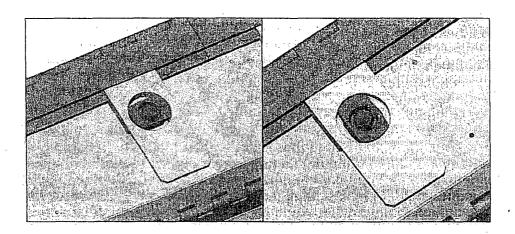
Clamshell Latch Locked Position (left) and Open Position (right)
